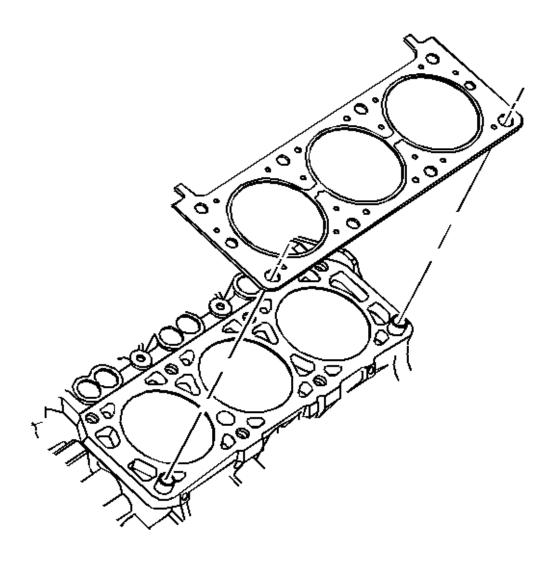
View Of Cylinder Head Gasket And Alignment Pins
